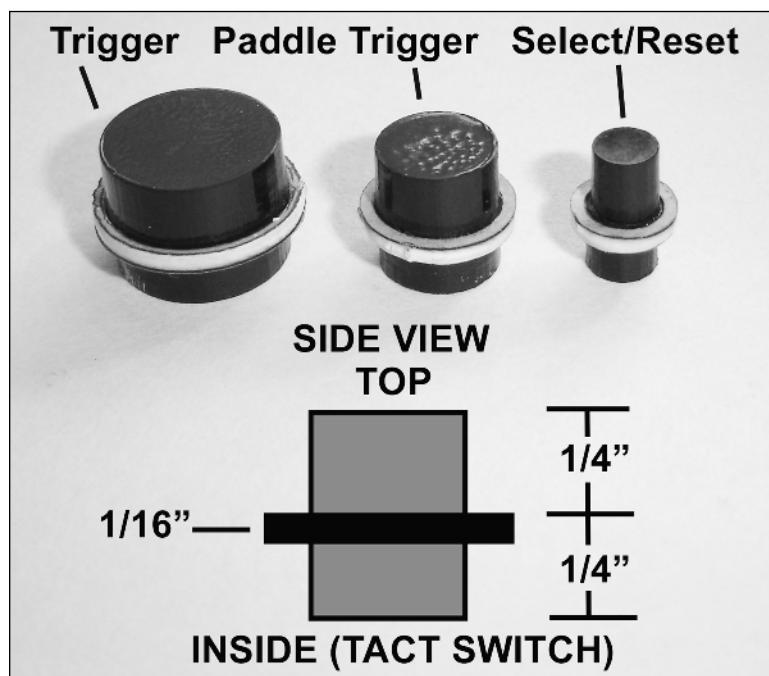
Top view and side view drawing of buttons/flange placement.
